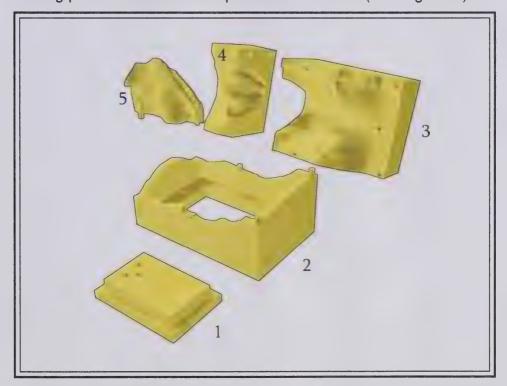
The resulting six-part main mold. The bottom access hatch (1), base of the mold (2), top of the mold (3), top part of mold and anchor for the nasal passage parts (4), nasal passage parts (5)
